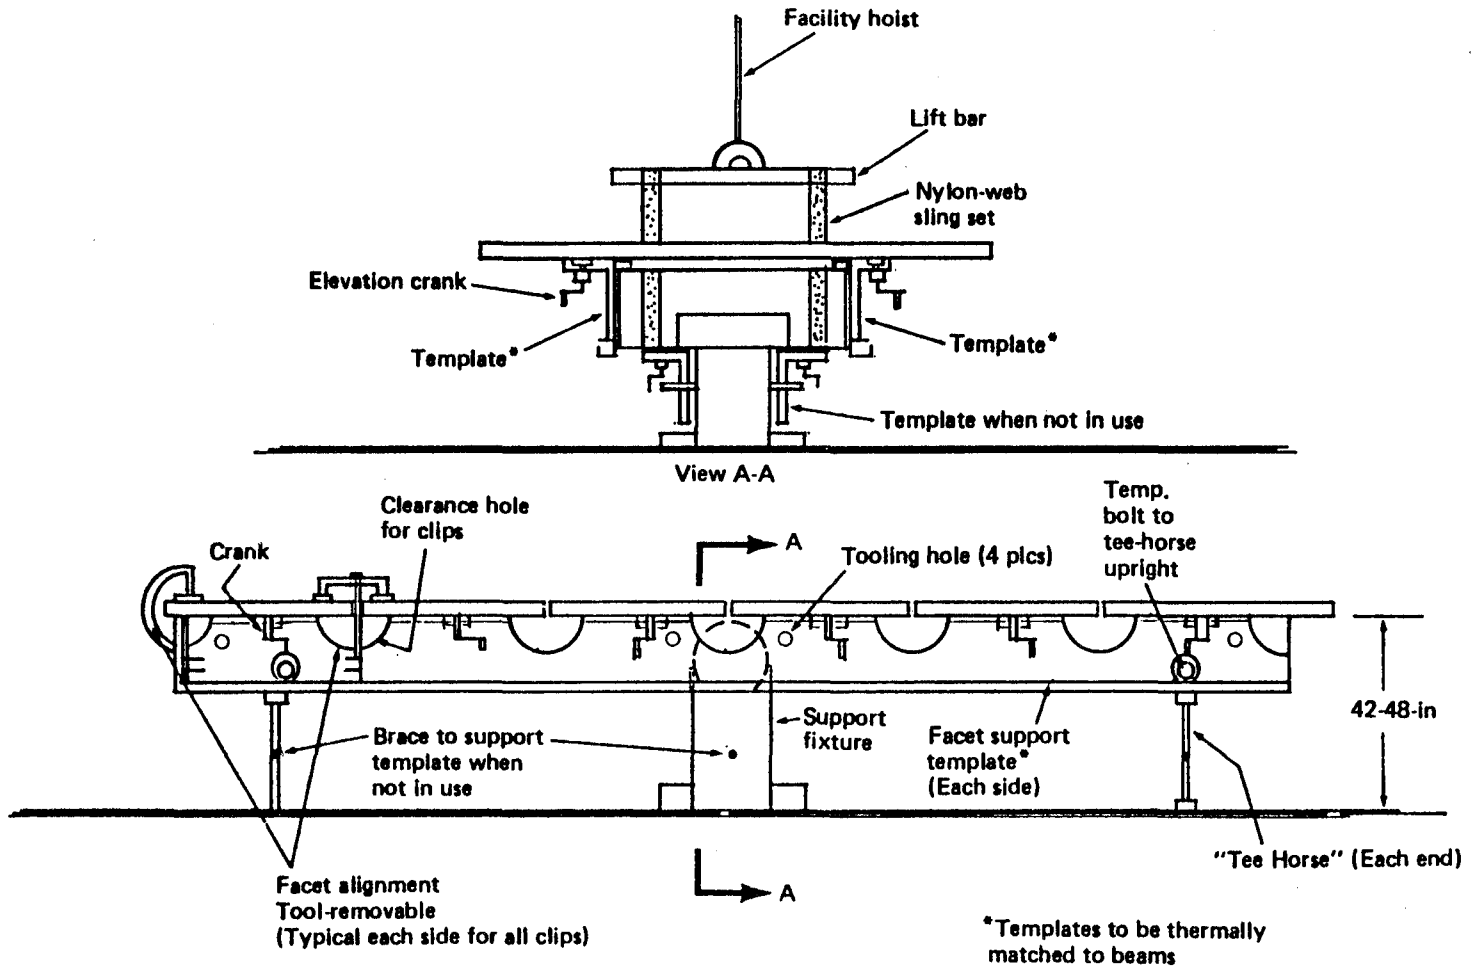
RH & LH Reflector Panel Assembly and Facet Alignment in SAB
